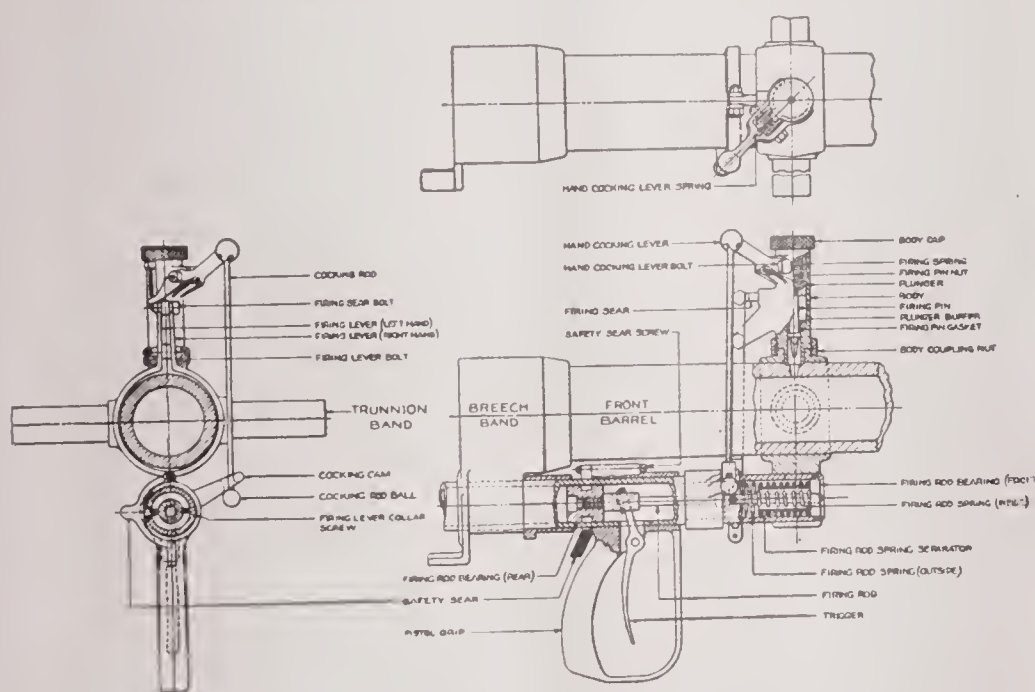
MECHANICAL DETAILS OF FIRING MECHANISM AND ATTACHMENTS.
